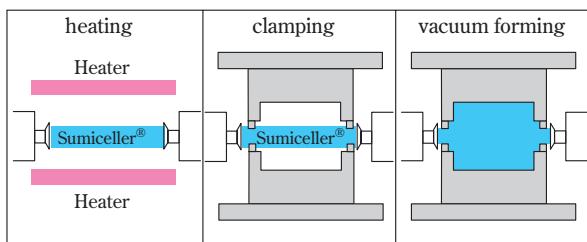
Foam Expansive Molding Process (Both side vacuum forming)
